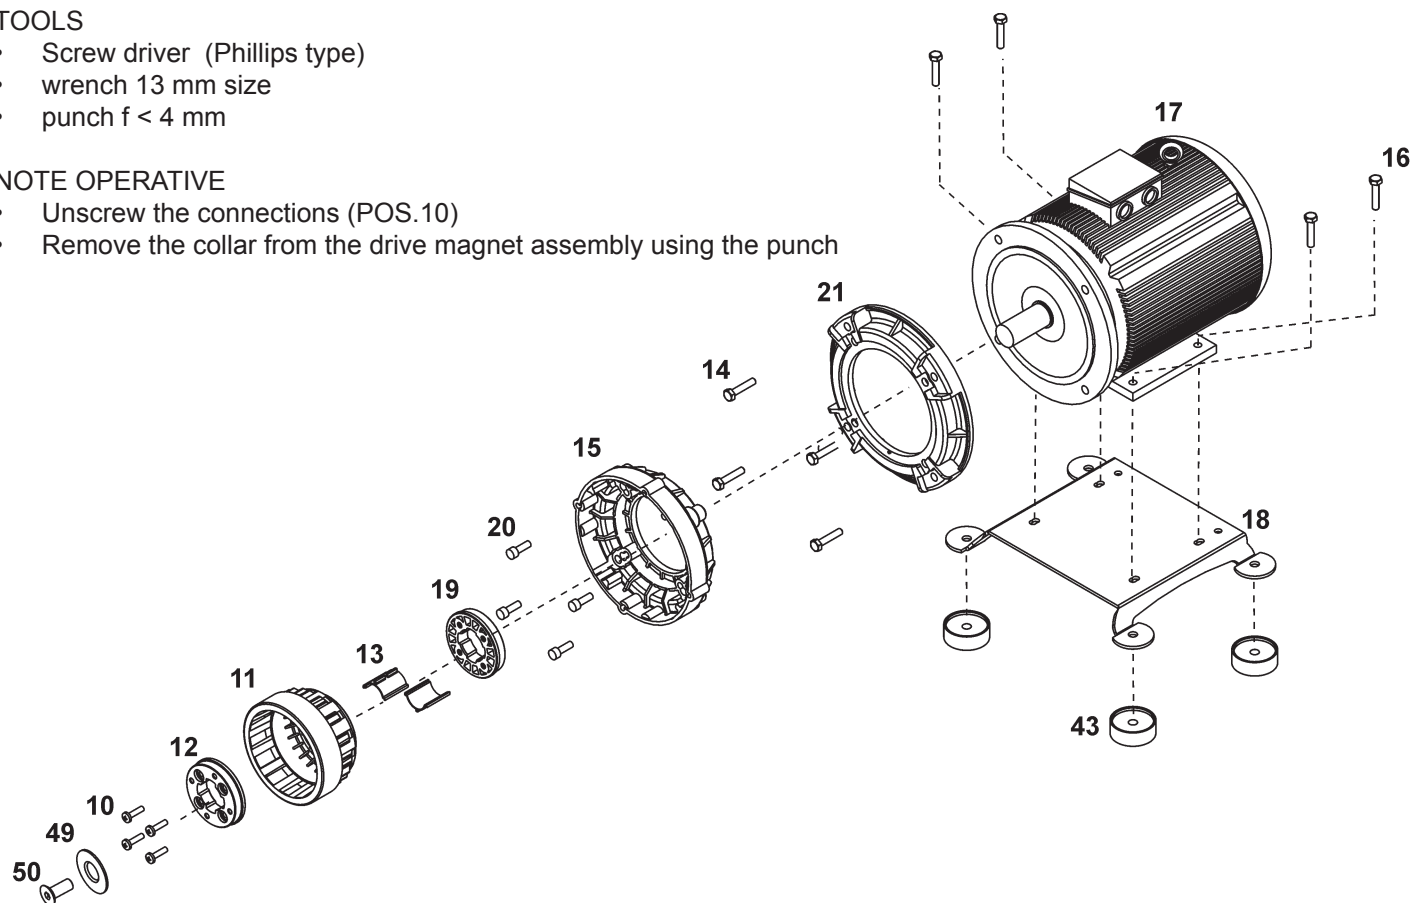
A – disassembling sequence MOTOR PARTS
